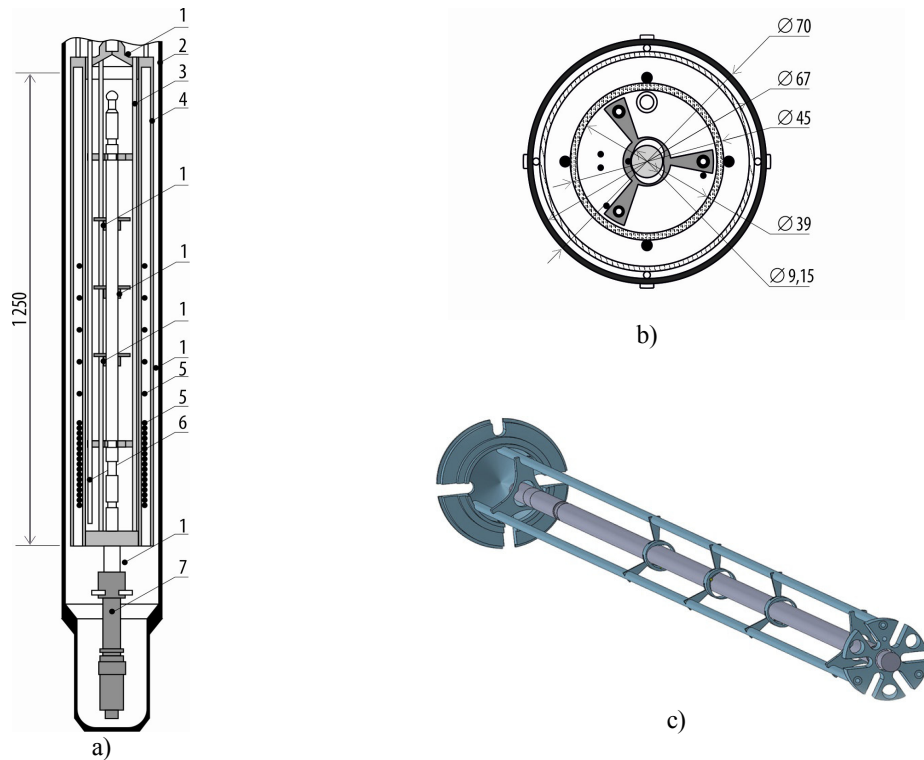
The constructive scheme (a), the cross section (b) and the fuel rod mount (c) of the TR:
